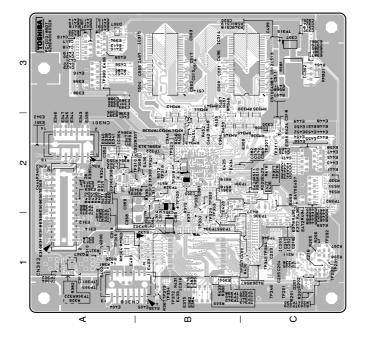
EU01 Digital PC Board (Bottom side)
